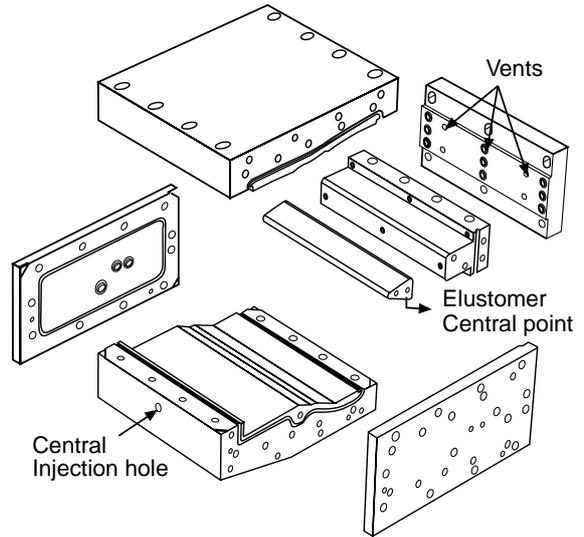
Exploded view of RTM mould for the production of composite torque links
